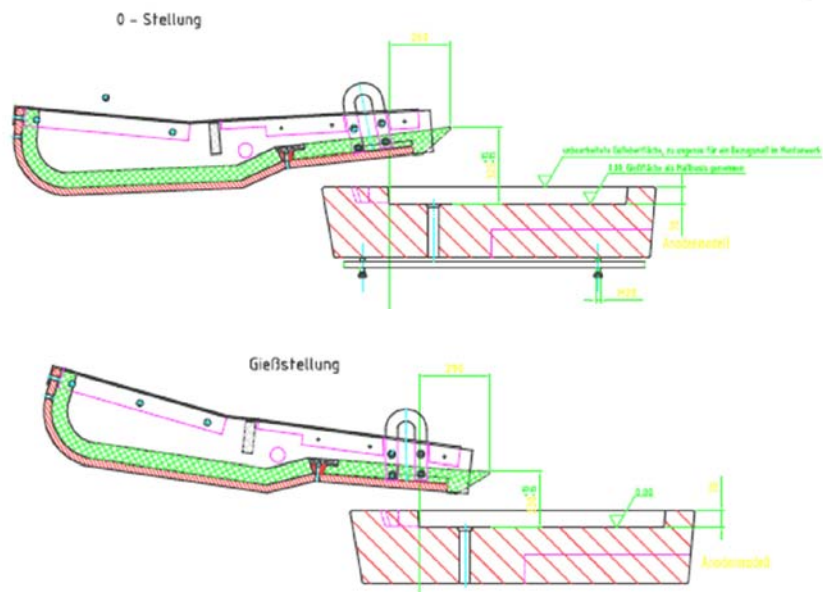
Casting mould in waiting position (upper picture) and casting position (lower picture)—Montanwerke Brixlegg AG
